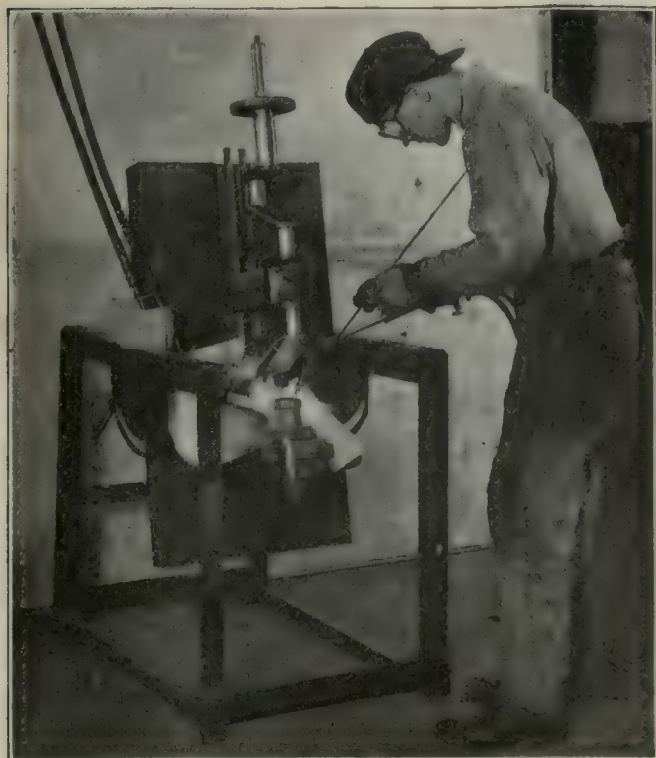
WELDING A BROKEN WEB IN THE JIG
